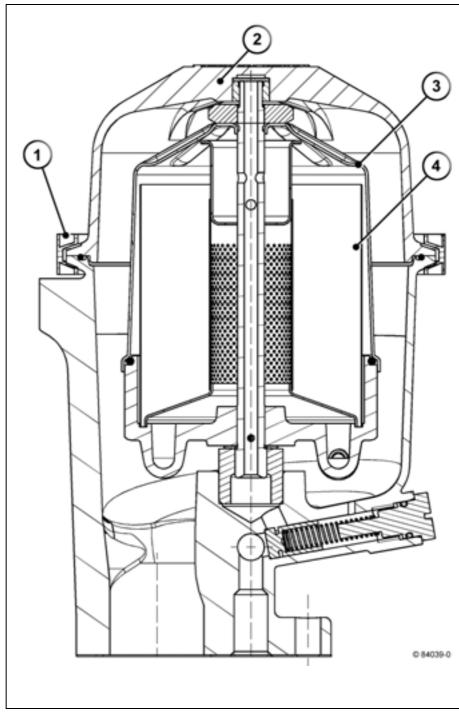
Centrifugal lube oil filter (lock with V belt clip)
